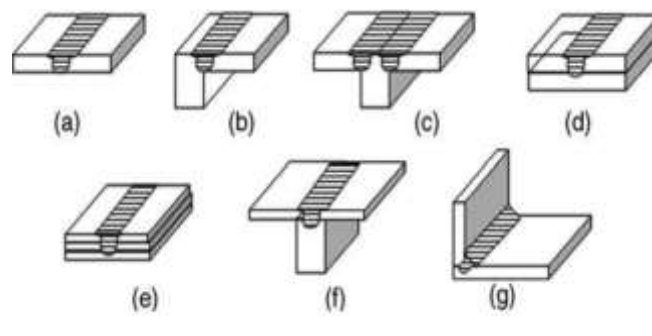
Various FSW joint configurations (a) Butt welding (b) Angle T-welding (c) Double T-welding (d) Double lap welding (e) Triple lap welding (f) T-welding (g) Angle welding
